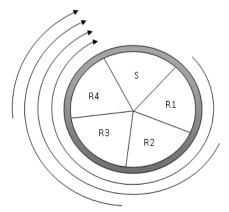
Repair technique on the samewelding joint (Repair sequences)
